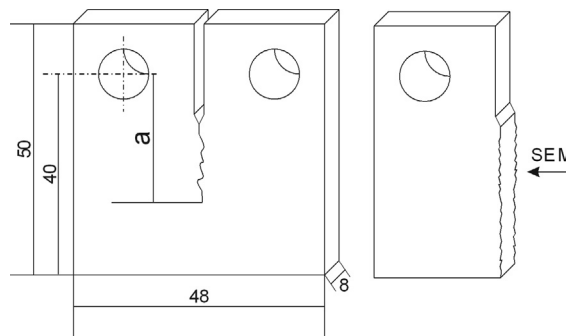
Geometry and main dimensions of the Compact Tension specimen used for testing and schematic representation of the fracture surface investigation.
